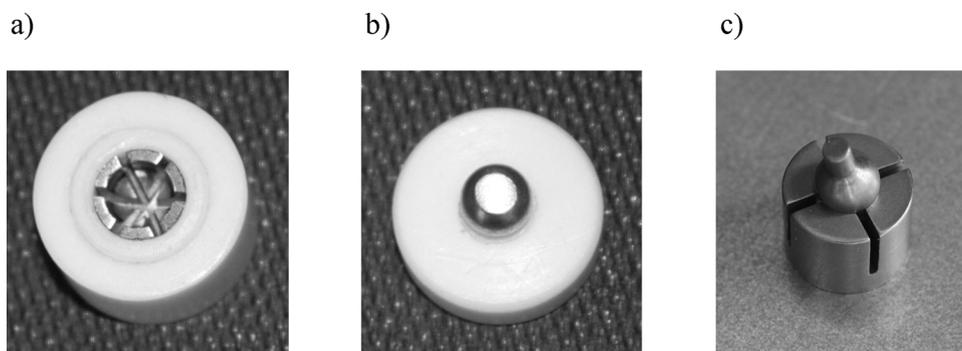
View of the elements of a manufactured ball bracket: a) Matrix, b) Patrix, c) criss-cross notched bracket.
